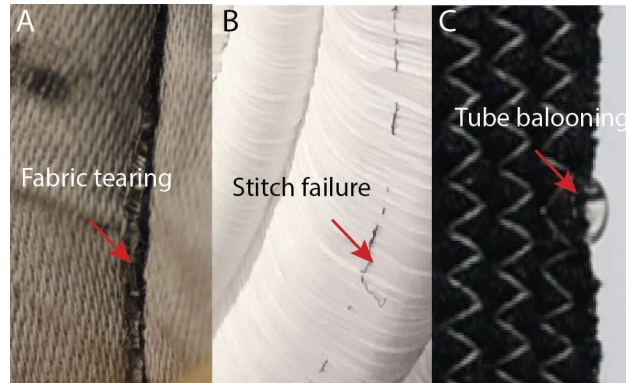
Examples illustrating failure modes. A. Fabric tearing at stitch locations. B. Stitching failure between fabric conduits. C. Tube ballooning between stitch locations.
